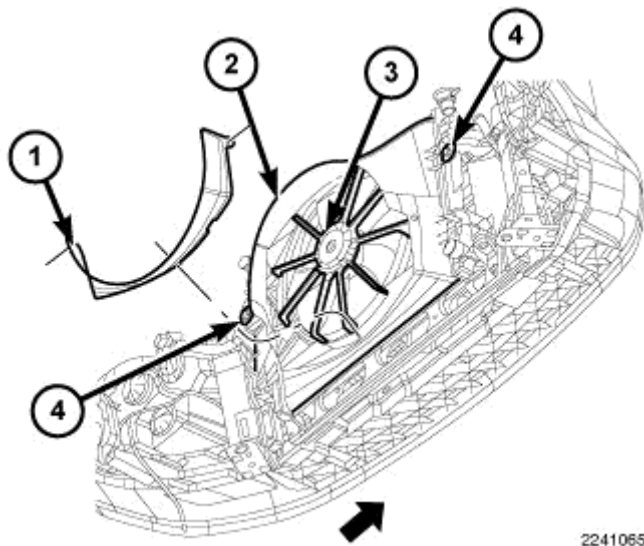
Radiator Fan, Shroud & Bolts
